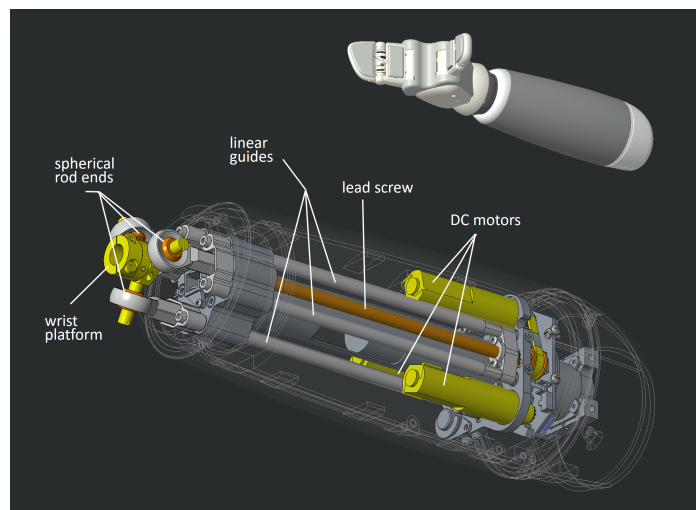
Wrist design. The wrist platform is assembled as shown with the covers assembled on top of it. In picture is the assembled version with the hand mounted on top.
